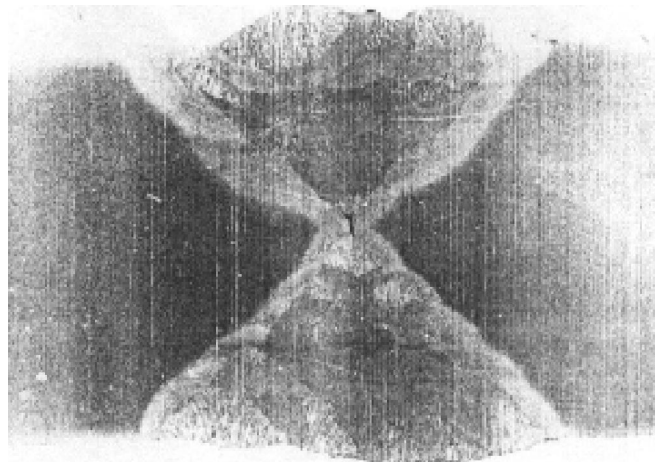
Macrograph of 30mm thick joint welded using MAG welding process and 25°C preheating.
